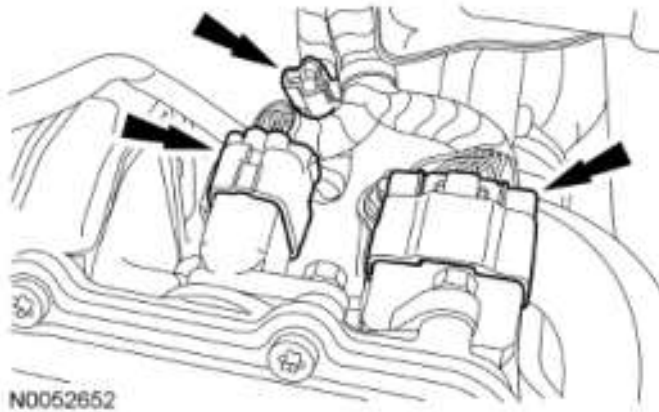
Locating Low Voltage Electrical Connectors And Engine Harness-To-Body Harness Retainer
